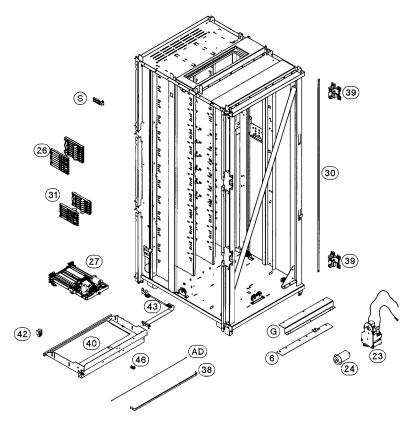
Exploded view for 3800ux/7100ux models (4 of 6)
